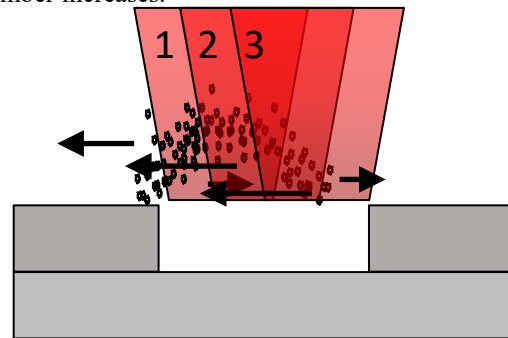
Arrangement of 7 laser spots in the shape of a flank
